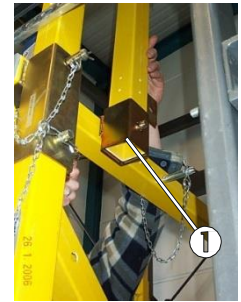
Positioning the fastening bolt part with the upper rail stanchion
